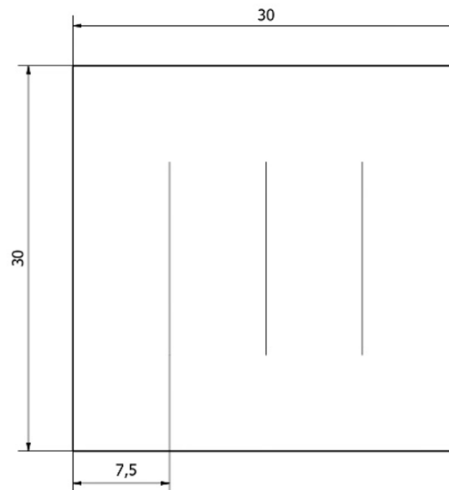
Thickness Measurement test point with Vernier Caliper on specimen
